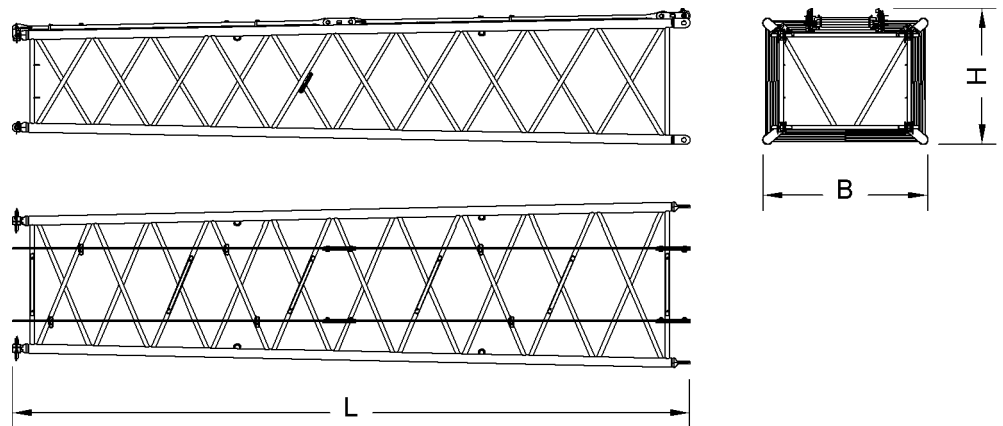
Dimensions of 2821/2316 reducing piece 40 ft
